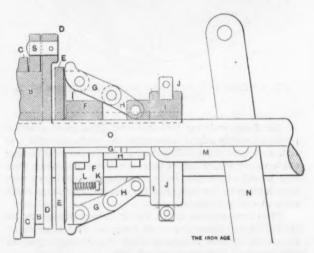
Detail of the Controlling Mechanism in Disengaged Position.
